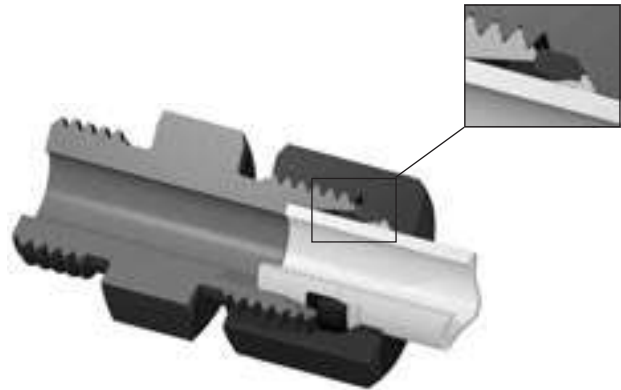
EO-2: The metallic support of the sealing ring acts just like an integrated preassembly tool.
